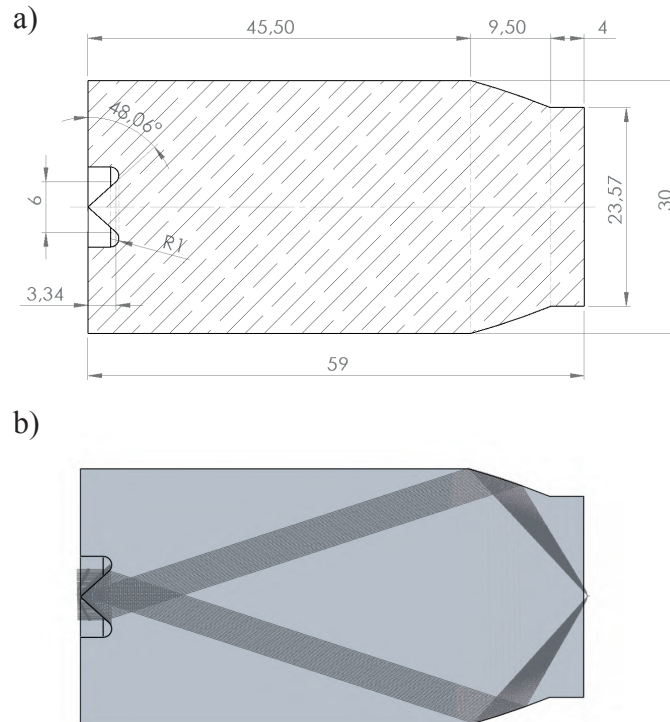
Final design of the trapping module; a) CAD drawing b) beam path in the system (fluidic chip is not shown)
